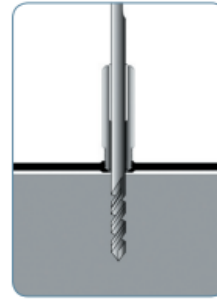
Surfix locking mechanism using a threaded locknut, from [10]
